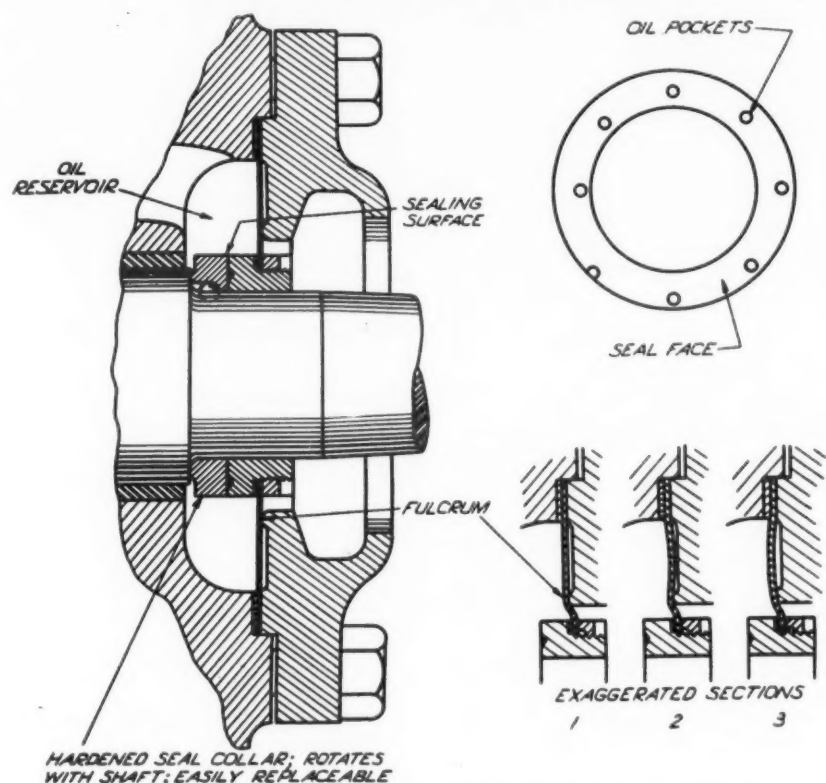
This patented type of shaft seal is claimed to maintain practically constant pressure on seal surface. For explanation of exaggerated sections, see text.
